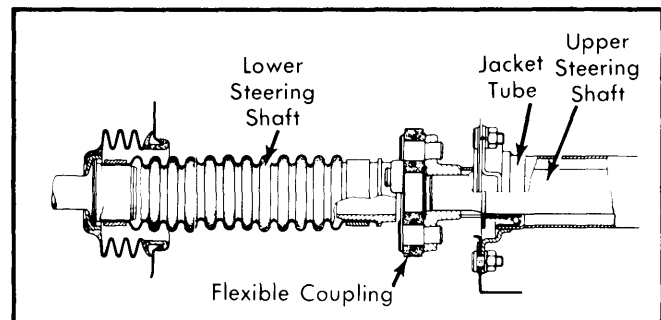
Lower Steering Shaft (230, 240D, 280E, 300D)
